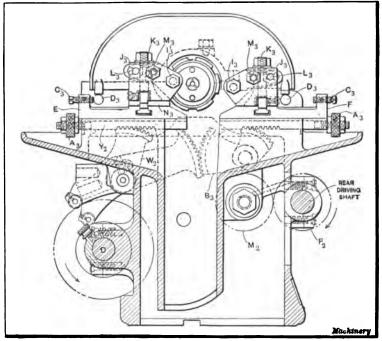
Partial Section of No. 00 Machine showing Operation of Cross-slides
